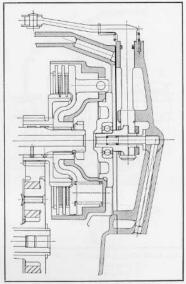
63 A Clutch mechanism 5 90, CL 90, CL 90 L, CD 90
